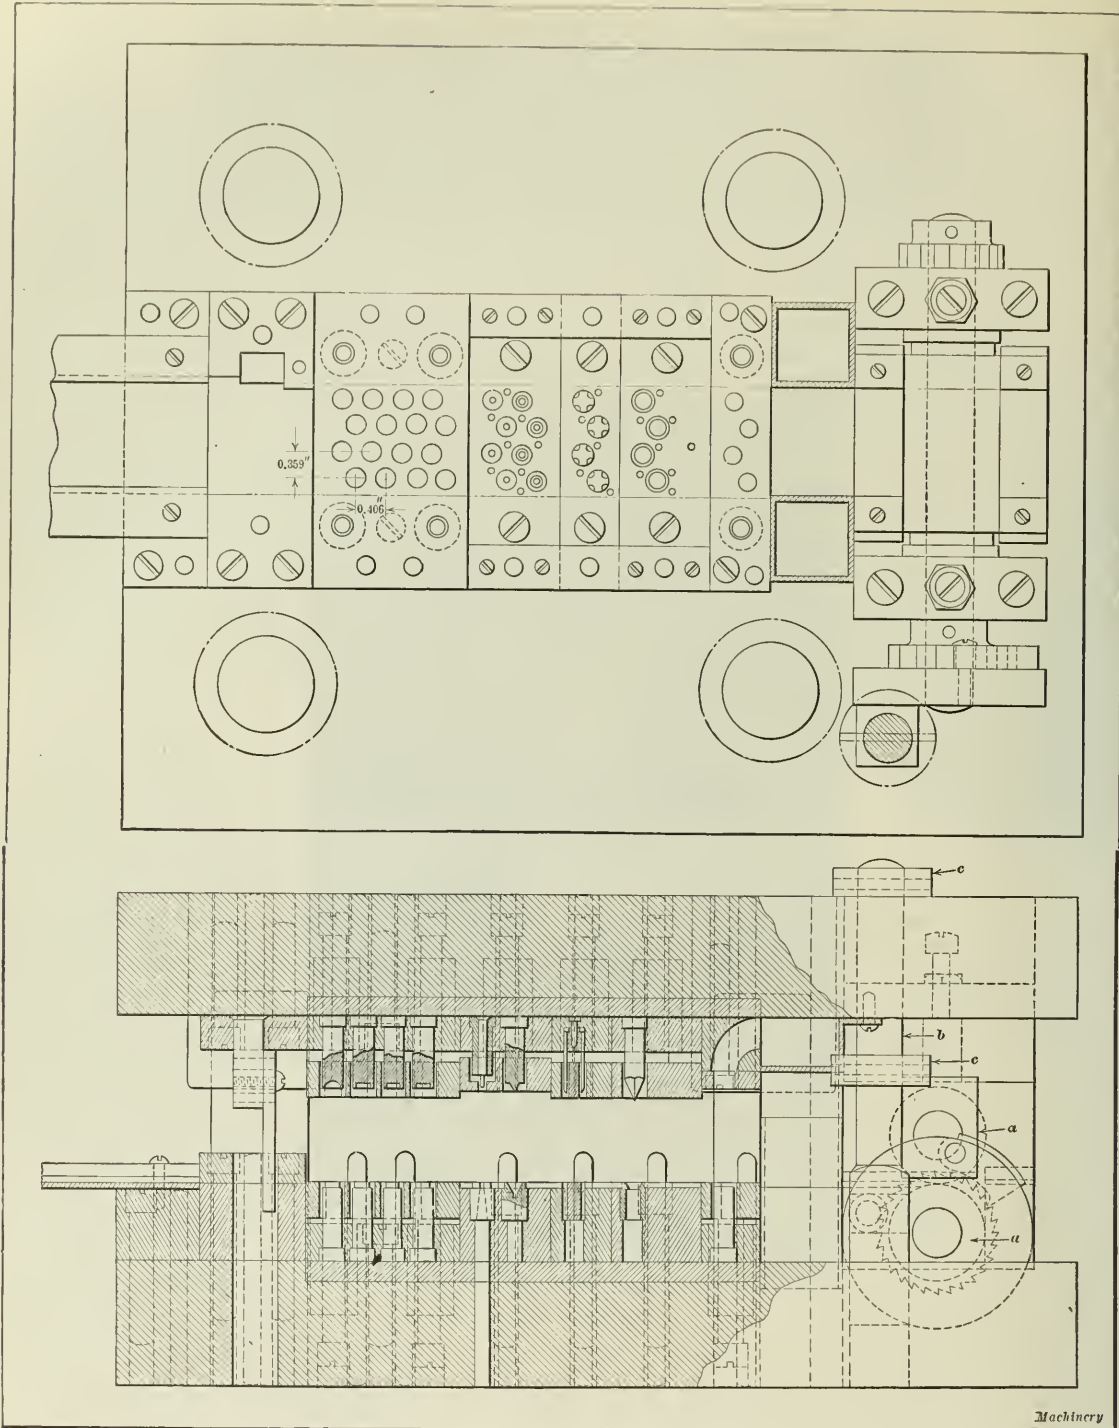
Cross-sectional View of Punch and Die for Socket, and Plan View of Lower Member
